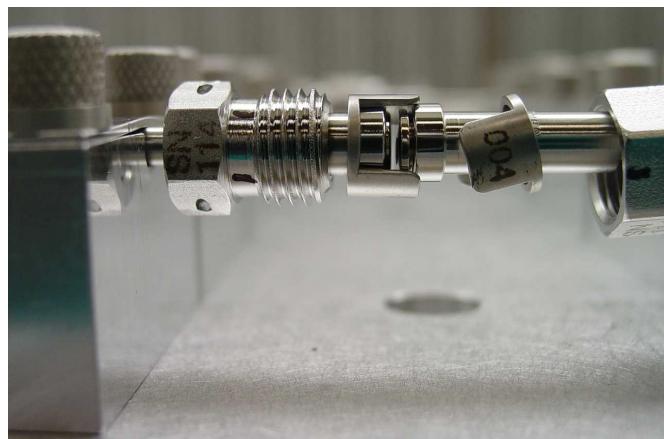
1/8 inch Fitting assembly: Gasket installed and captured by Torque Eliminator.
